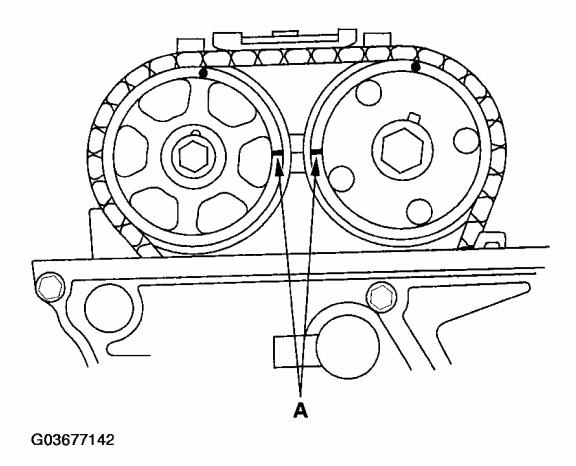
Identifying Aligned Variable Valve Timing Control And Exhaust Camshaft Sprocket Marks
